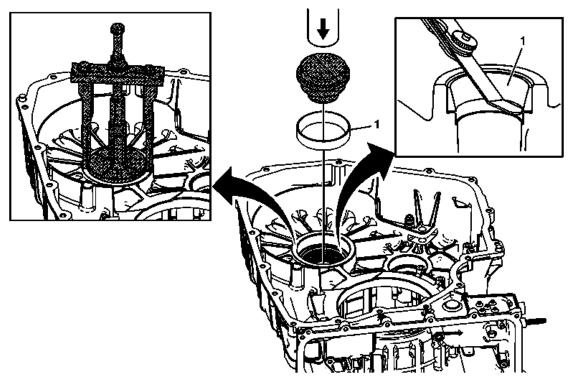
Identifying Front Wheel Drive Shaft Oil Seal Courtesy of GENERAL MOTORS COMPANY
